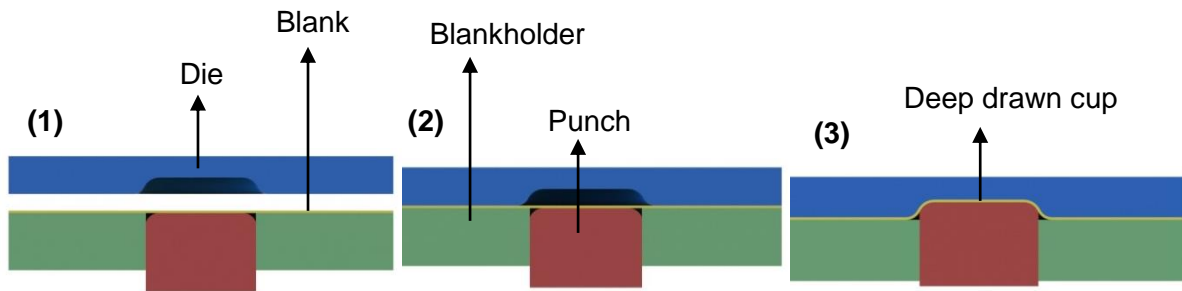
Stages of deep drawing experiment: (1) positioning (2) initial contact (3) deep drawing
